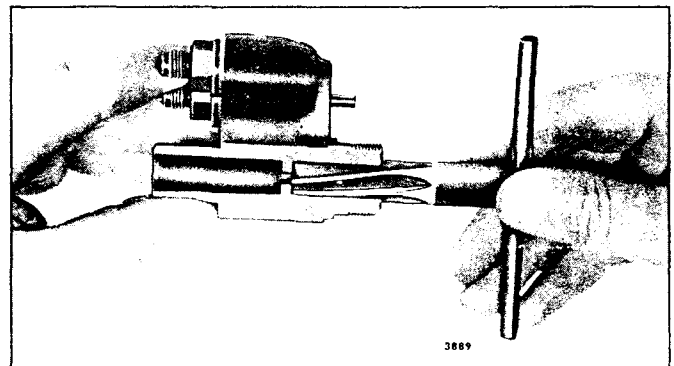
Cleaning Injector Body Ring with Tool J 21089
